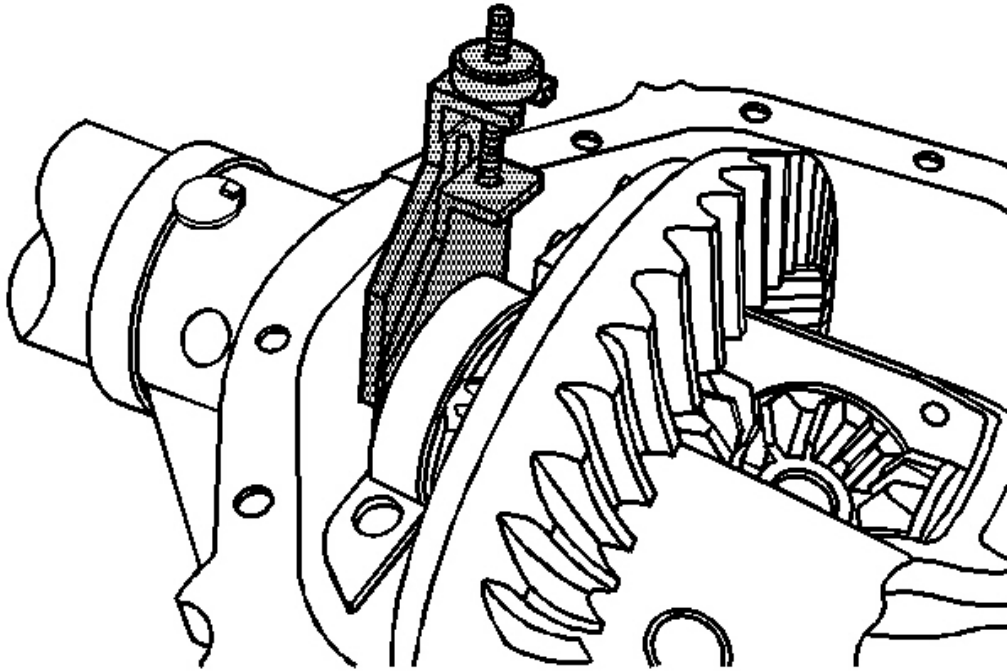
Installing J 22779 Into Left Side Axle Housing
